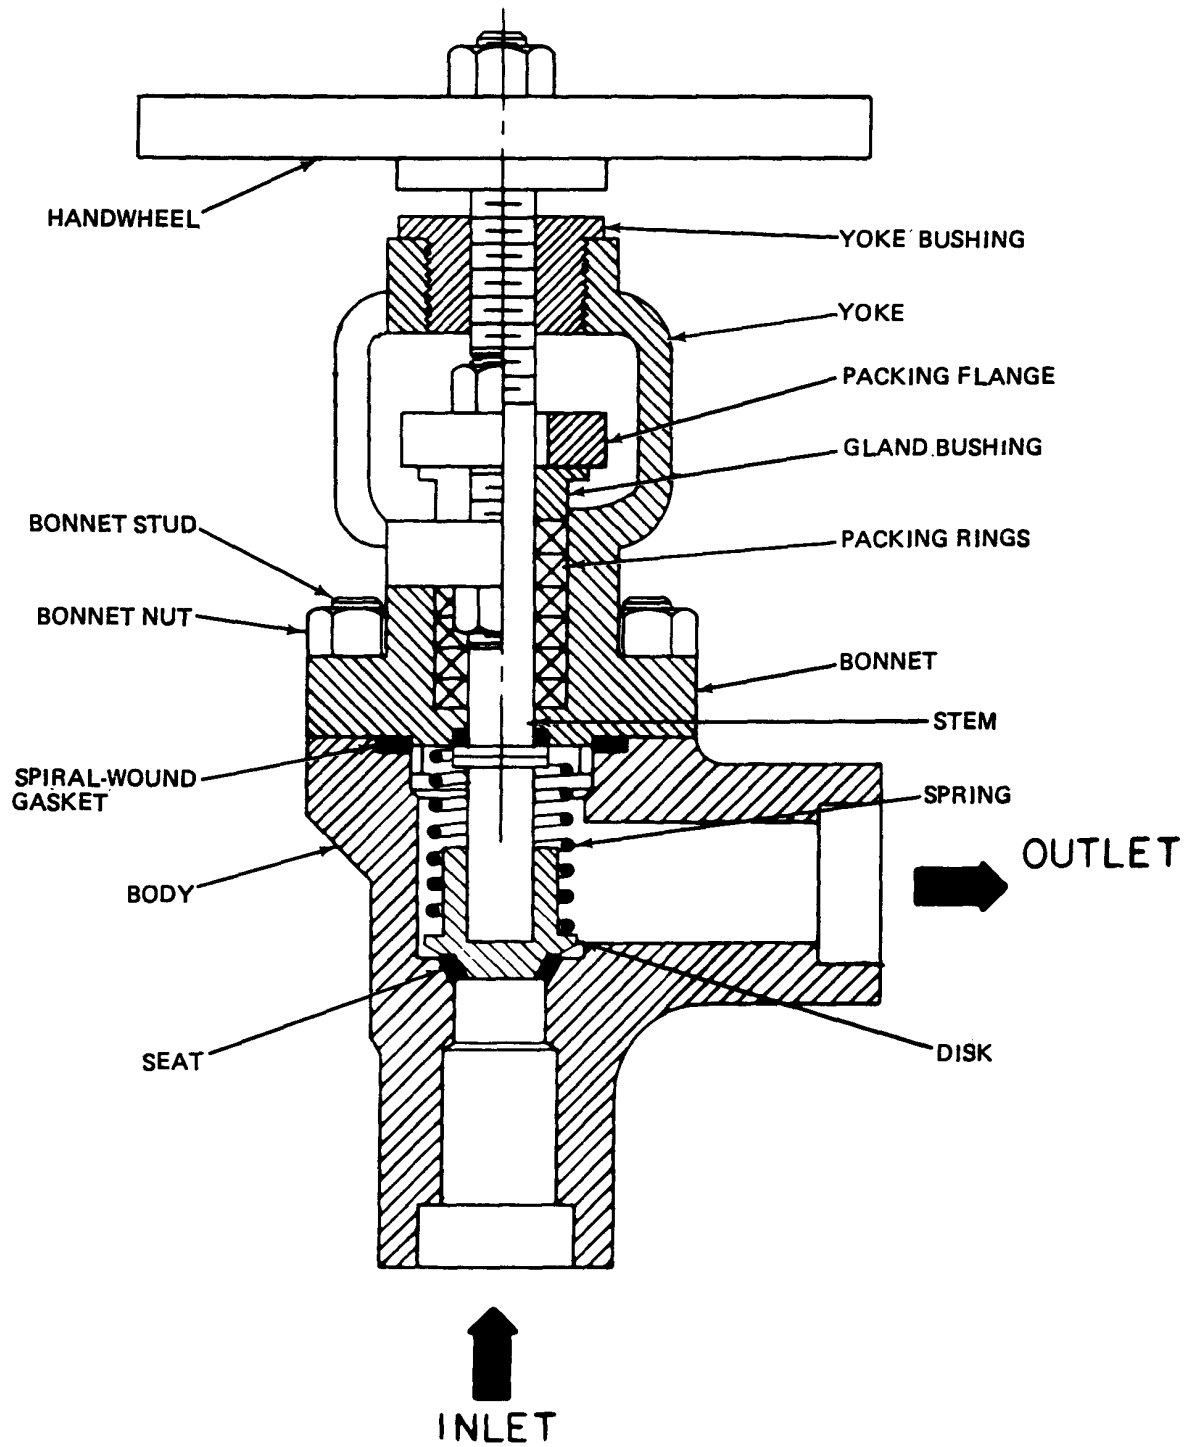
Bolted-Bonnet Stop Check Valve (Typical)
